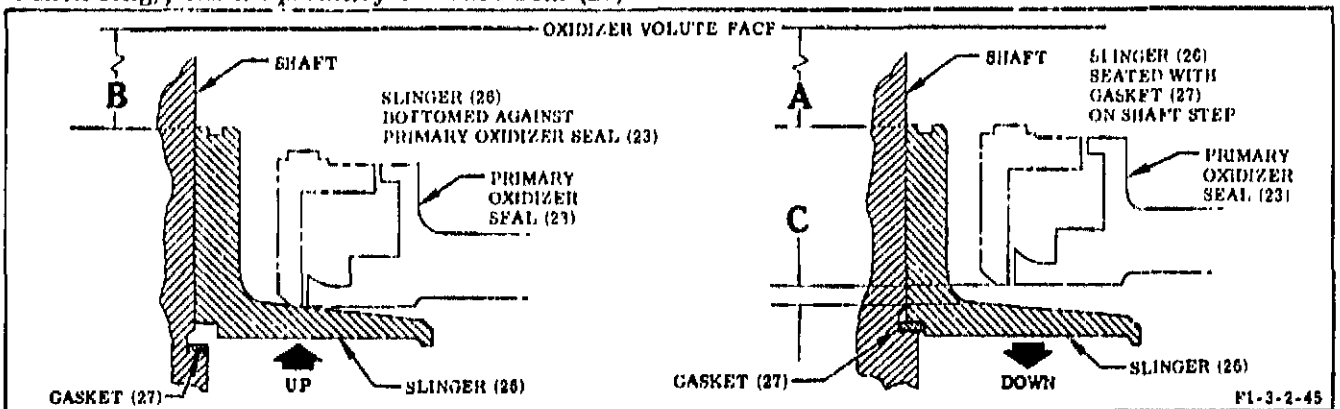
Determining Primary Oxidizer Seal-to-Slinger Clearance
